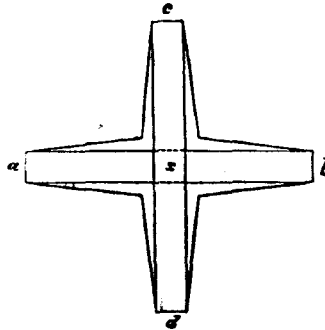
SECTION OF 10-FOOT END-MEASURING BARS.
